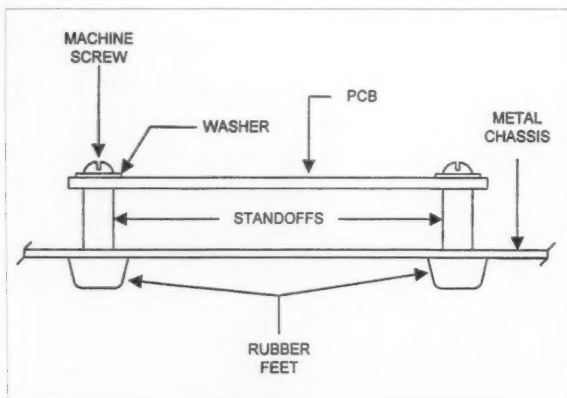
Mounting a PCB with rubber feet on the chassis.
